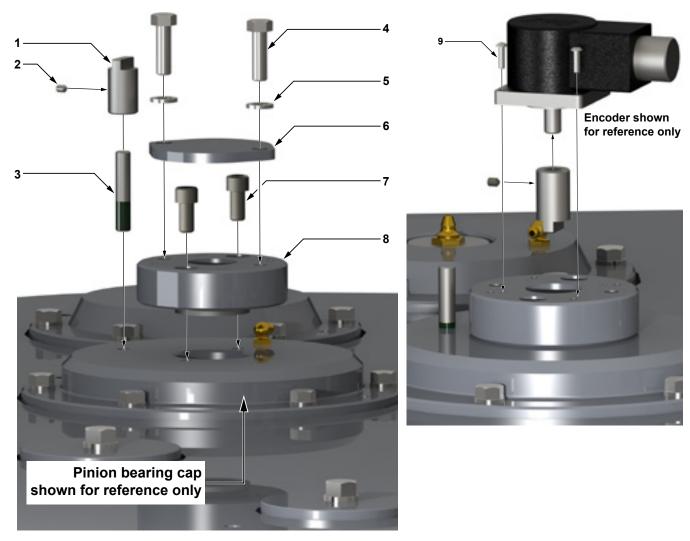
Shaft-Drive Turn Counter Encoder Mount (Type 2)
